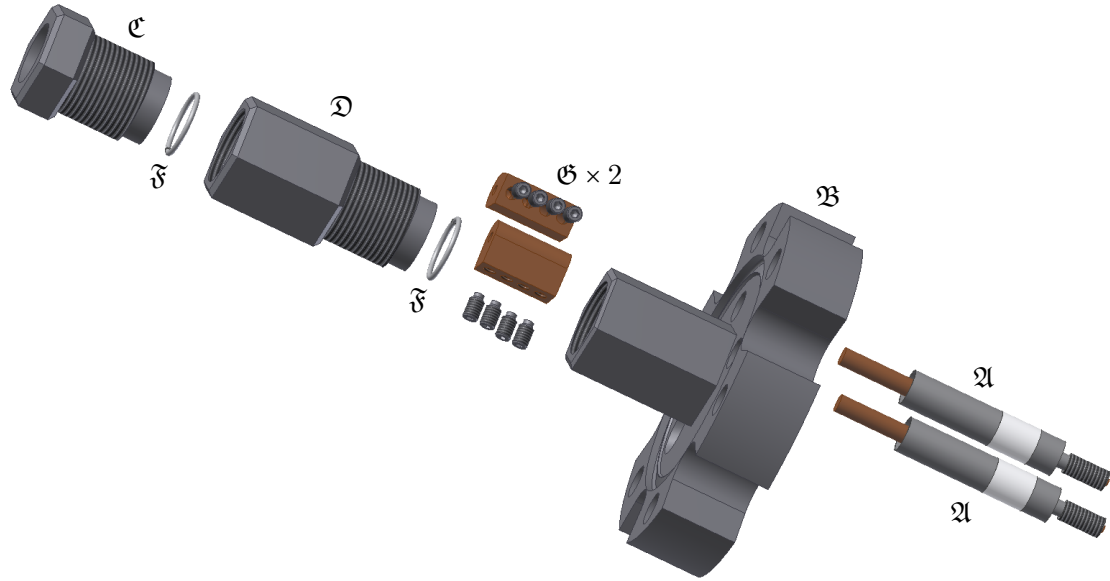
Assembly of the Main Evaporator’s Base Flange — Two ceramic isolated electrical feedthroughs (A) are welded into a custom made 40CF flange (B) with a hexagonal extension. The crucible (not shown, see Figure 2.13) is held by two compression fitting connections. Nuts (C, D) mold the ferrules (F), which are made from pure aluminum wire^a, against the crucible and keep it safe in place. The copper barrel G connectors join the feedthroughs with the tantalum posts (Figure 2.14) of the heater for the crucible.
